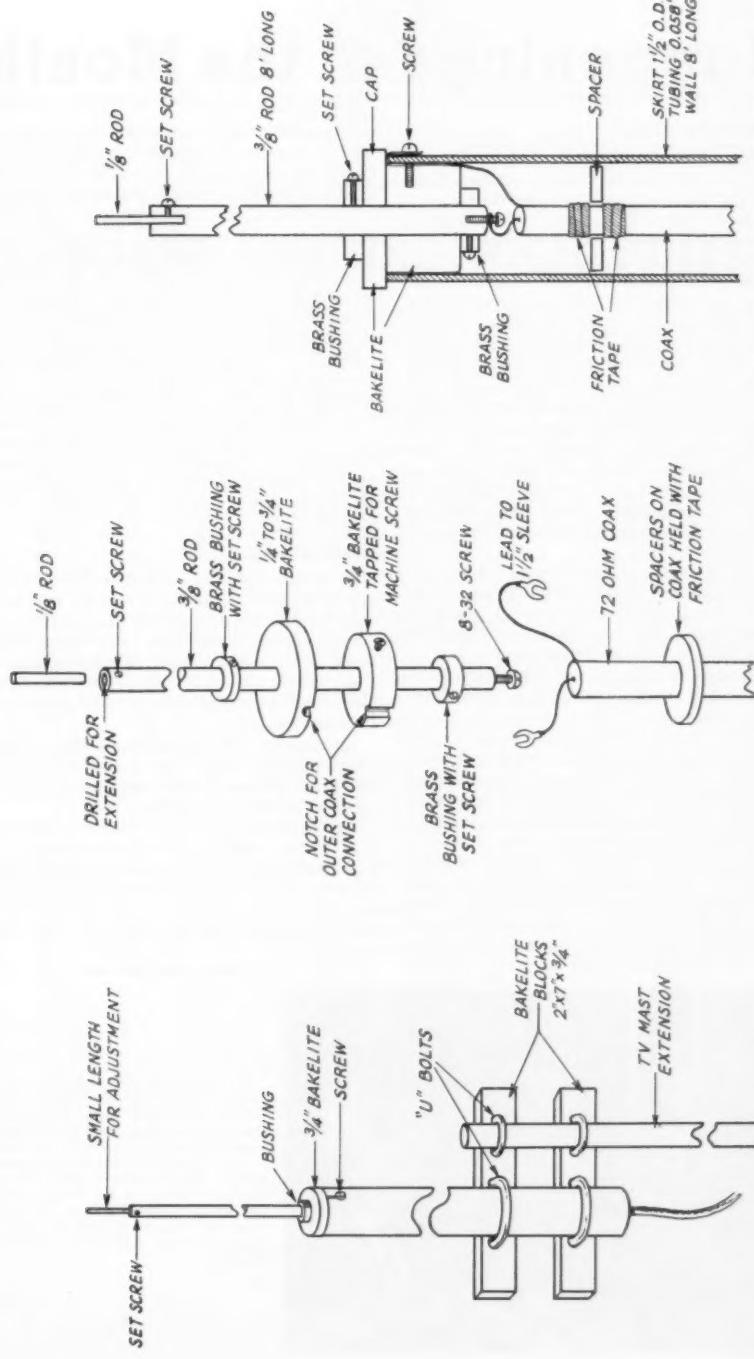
Sketch showing the completed antenna and mounting assembly.
